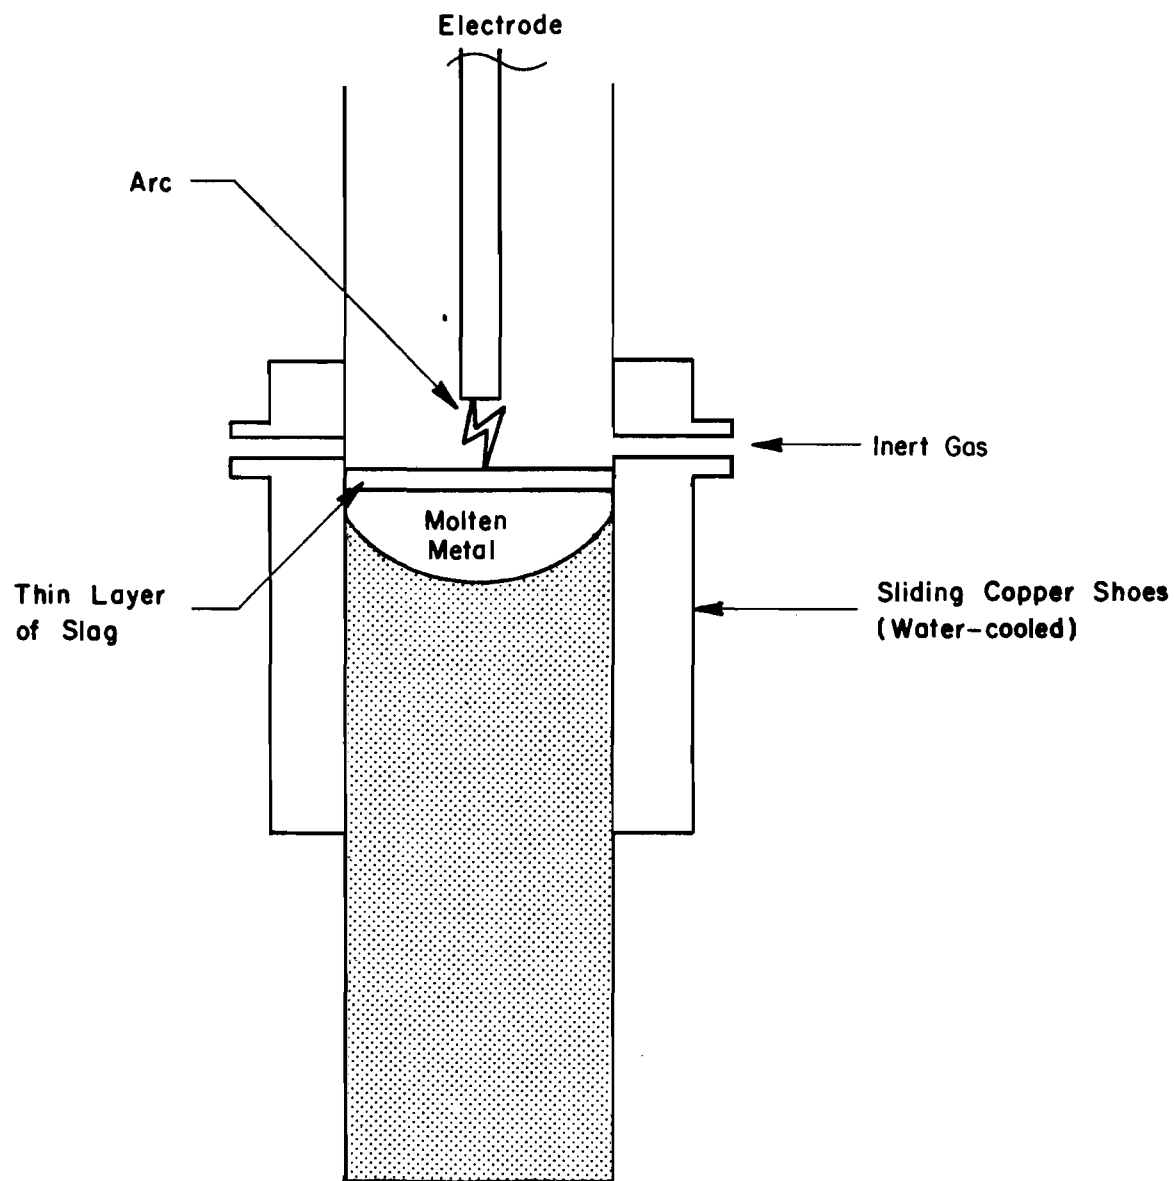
Schematic illustrating the electrogas method of depositing the weld metal.
